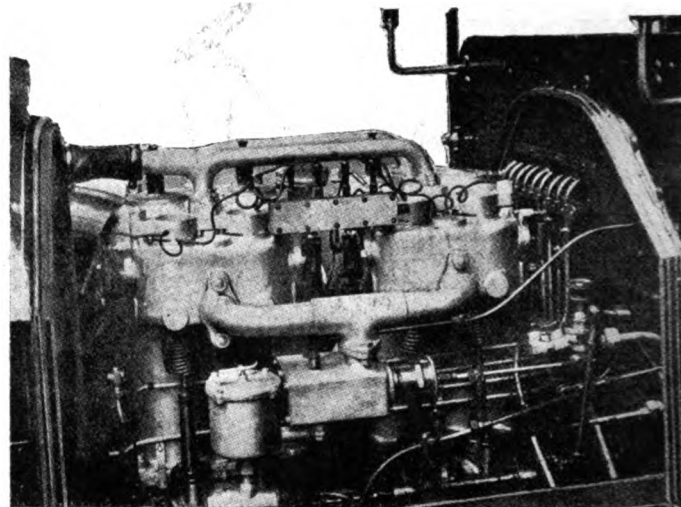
View of Inlet Side of 1904 Mercedes 18-28-h.p. Engine.
